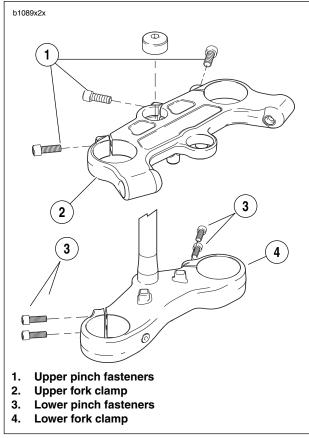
Upper and Lower Fork Clamp Pinch Fasteners
